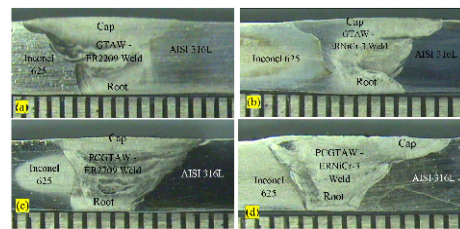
Macrostructure of the dissimilar weldments of Inconel 625 and AISI 316L employing CCGTA welding using: (a) ER2209 filler; (b) ERNiCr-3 filler and PCGTA welding employing: (c) ER2209 filler; (d) ERNiCr-3 filler, respectively.
